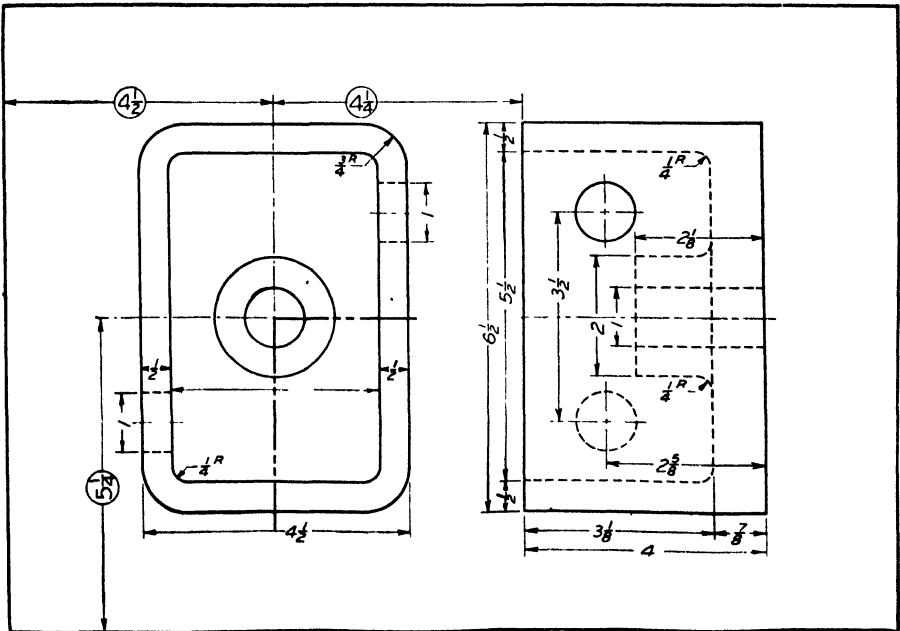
Prob. 146. Make a two-view drawing of the *protected bearing*, showing the right-hand view as a half section. Read Art. 6-4.
